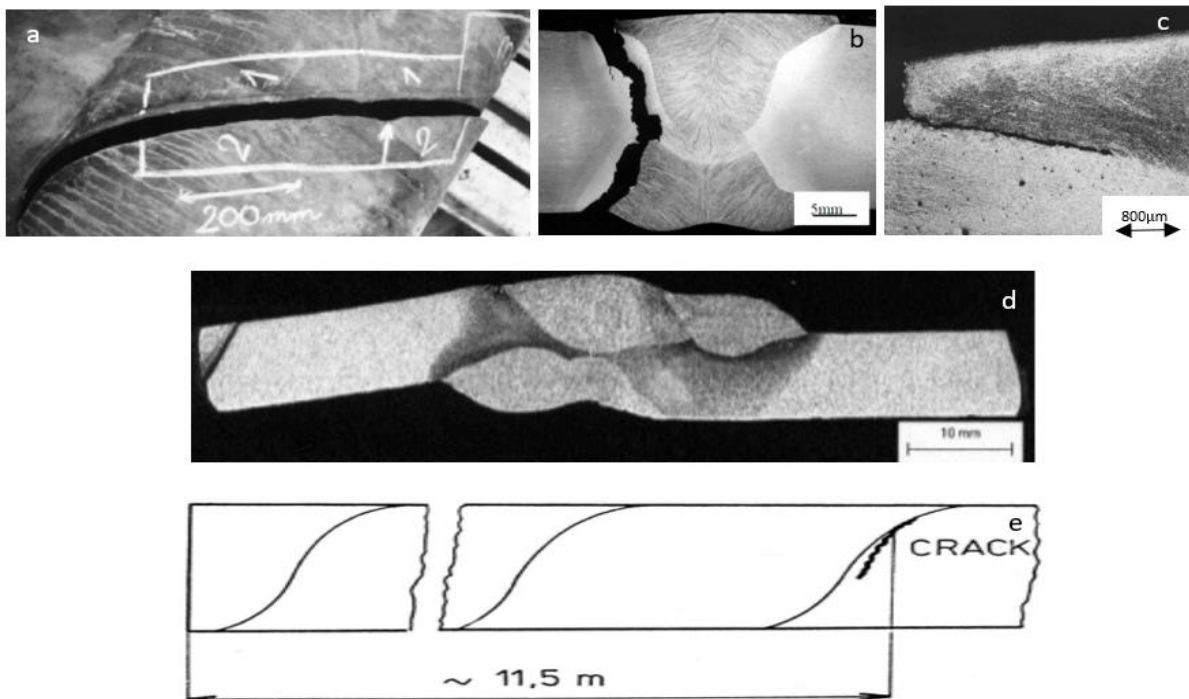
(a) crack along Spiral weld; (b) fracture spiral weld wall (HAZ); (c) overlapping due to impression of weld (d) poor workmanship revealing linear and opposite weld runs and (e) sketch of fractured pipes (Bernasovsky, 2013)
